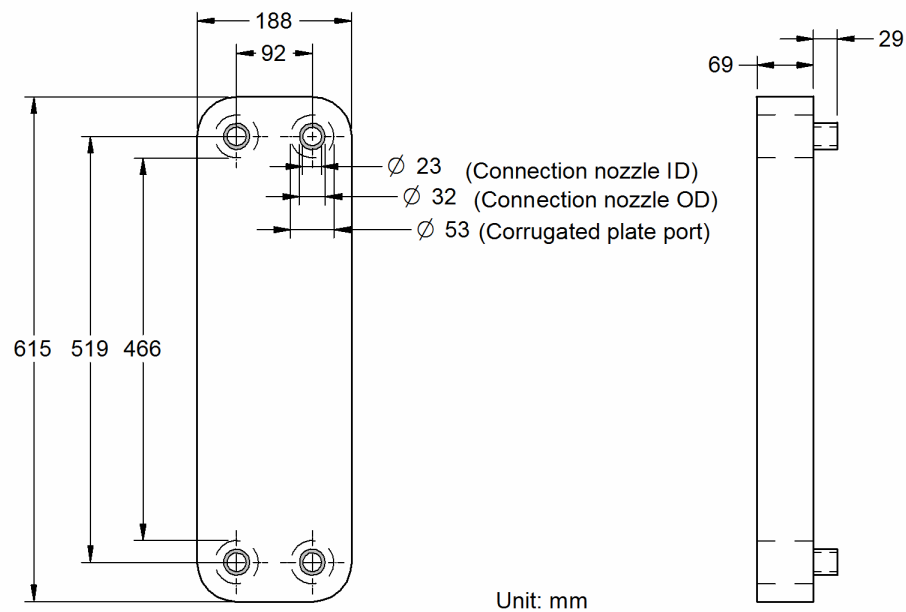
BPHE B3-095-24-30 Unit dimensions
